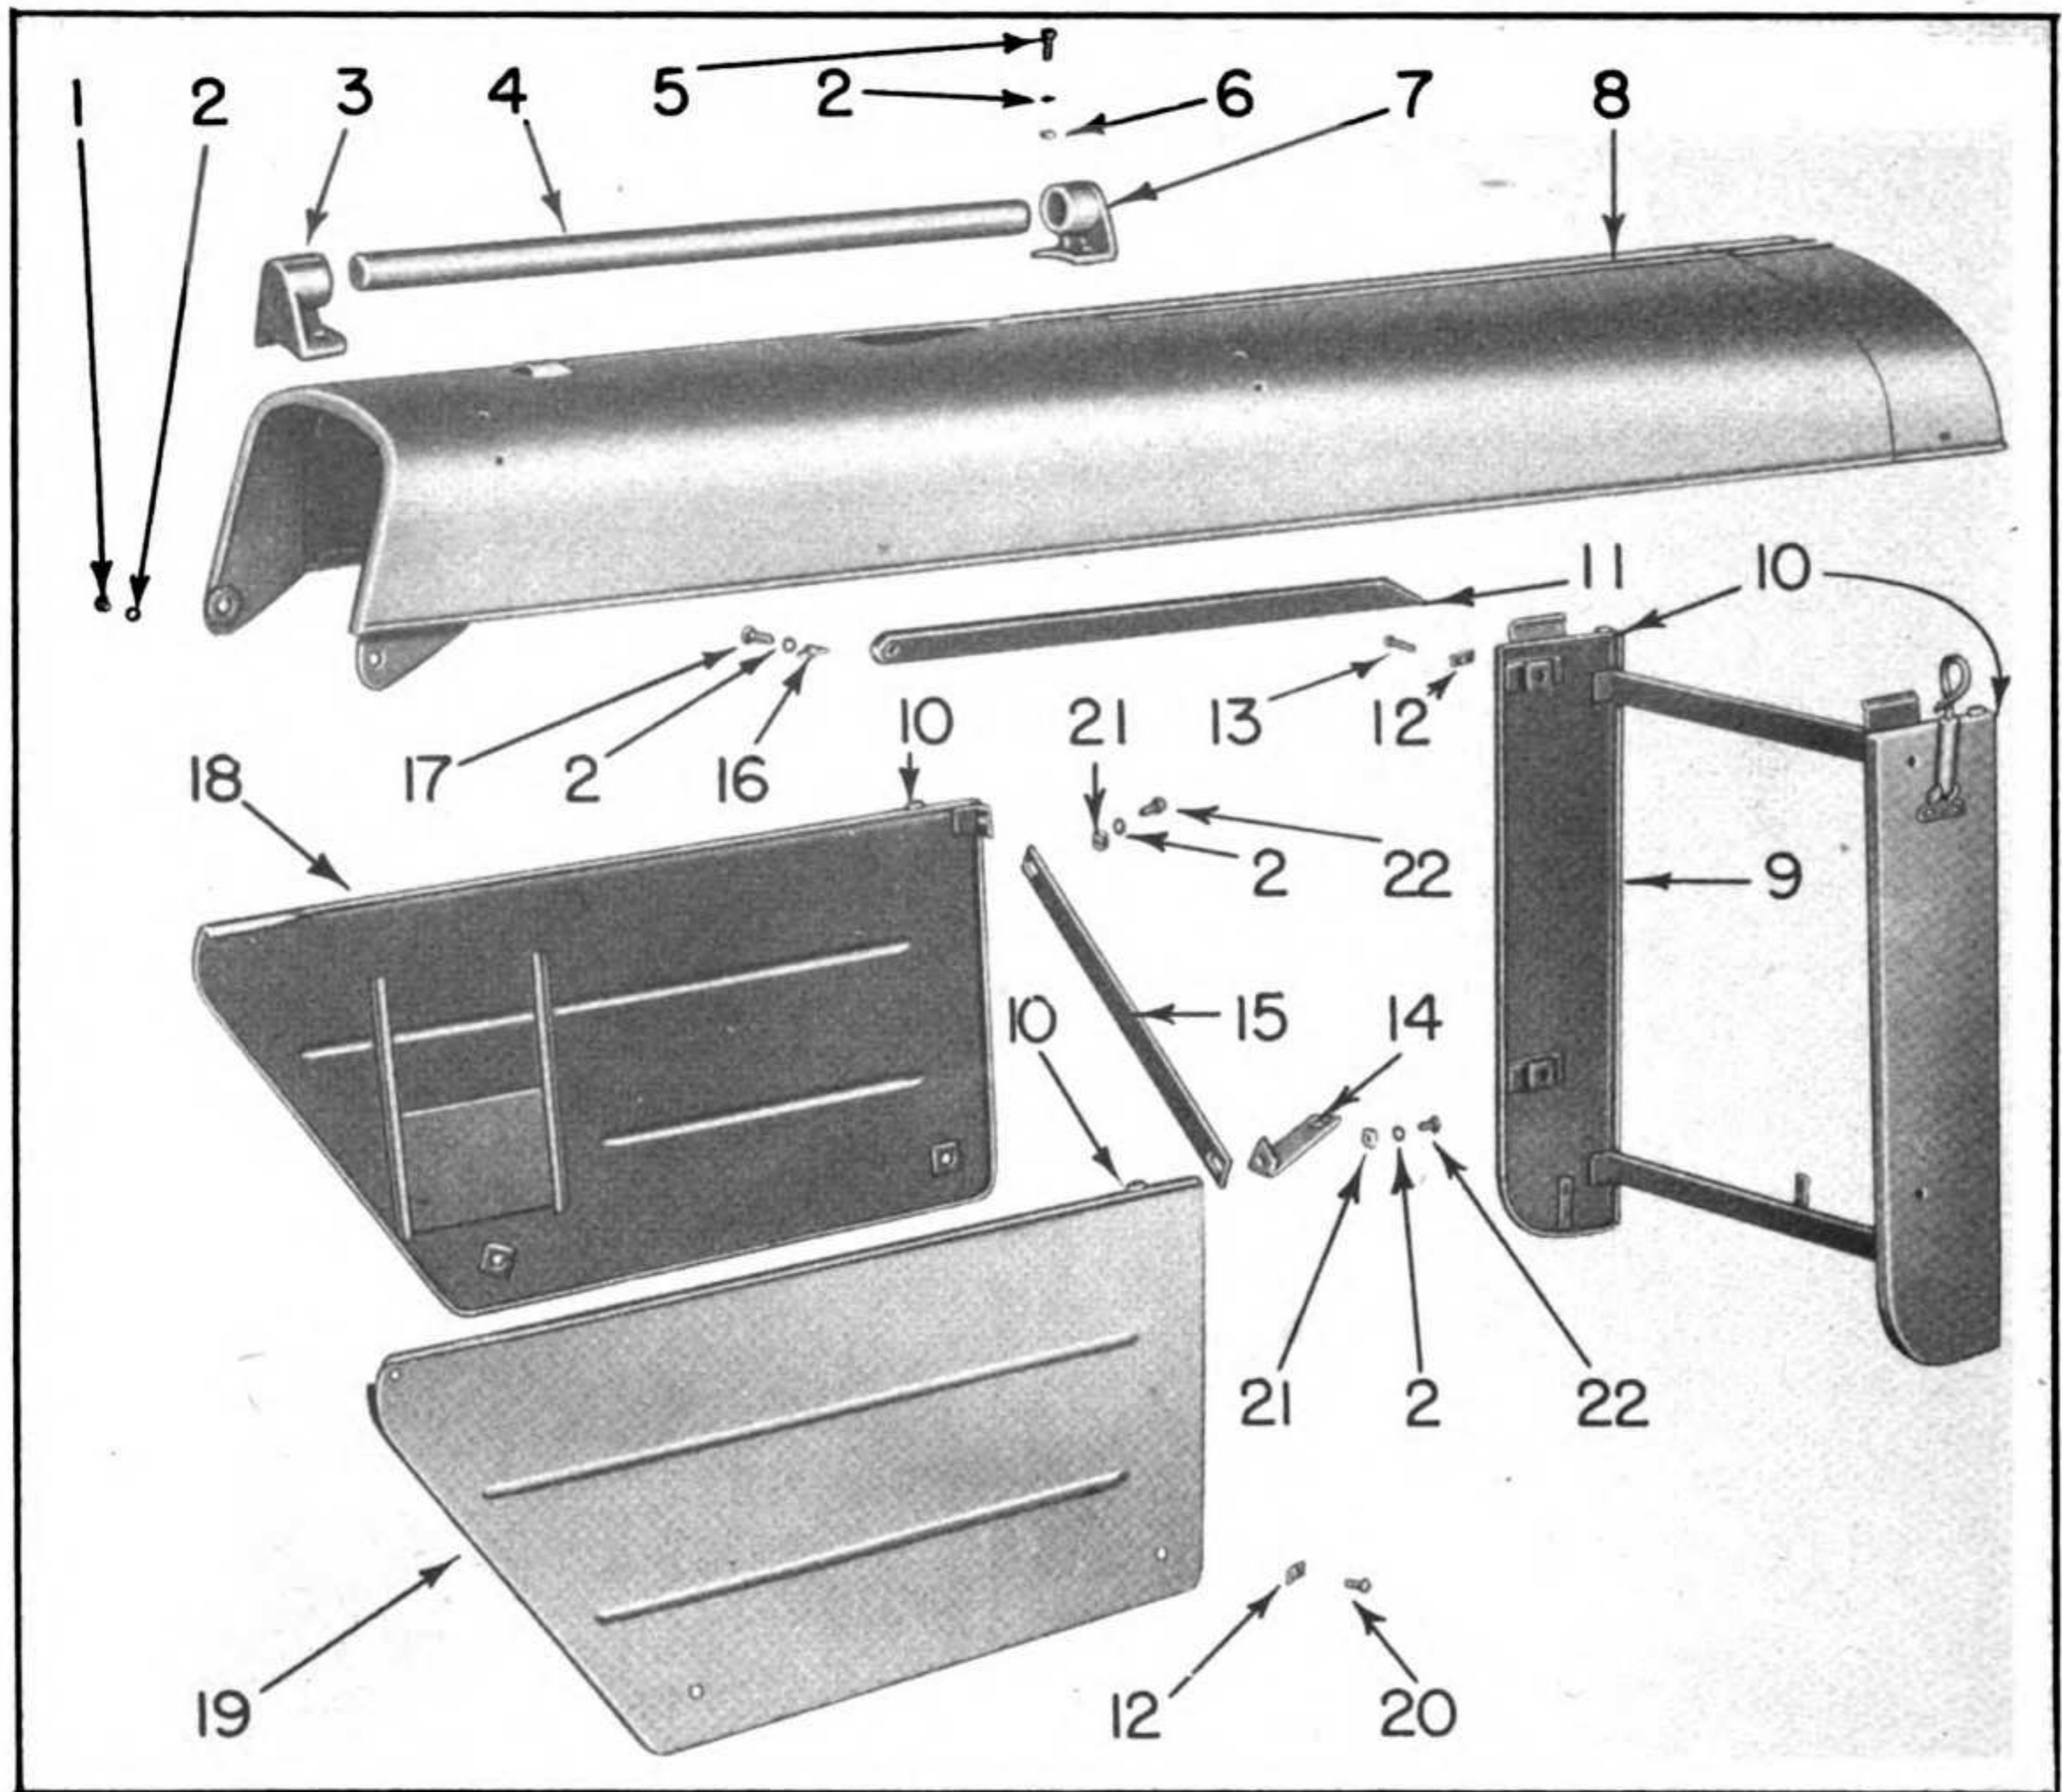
1703 HOOD AND PANEL ASSEMBLY
